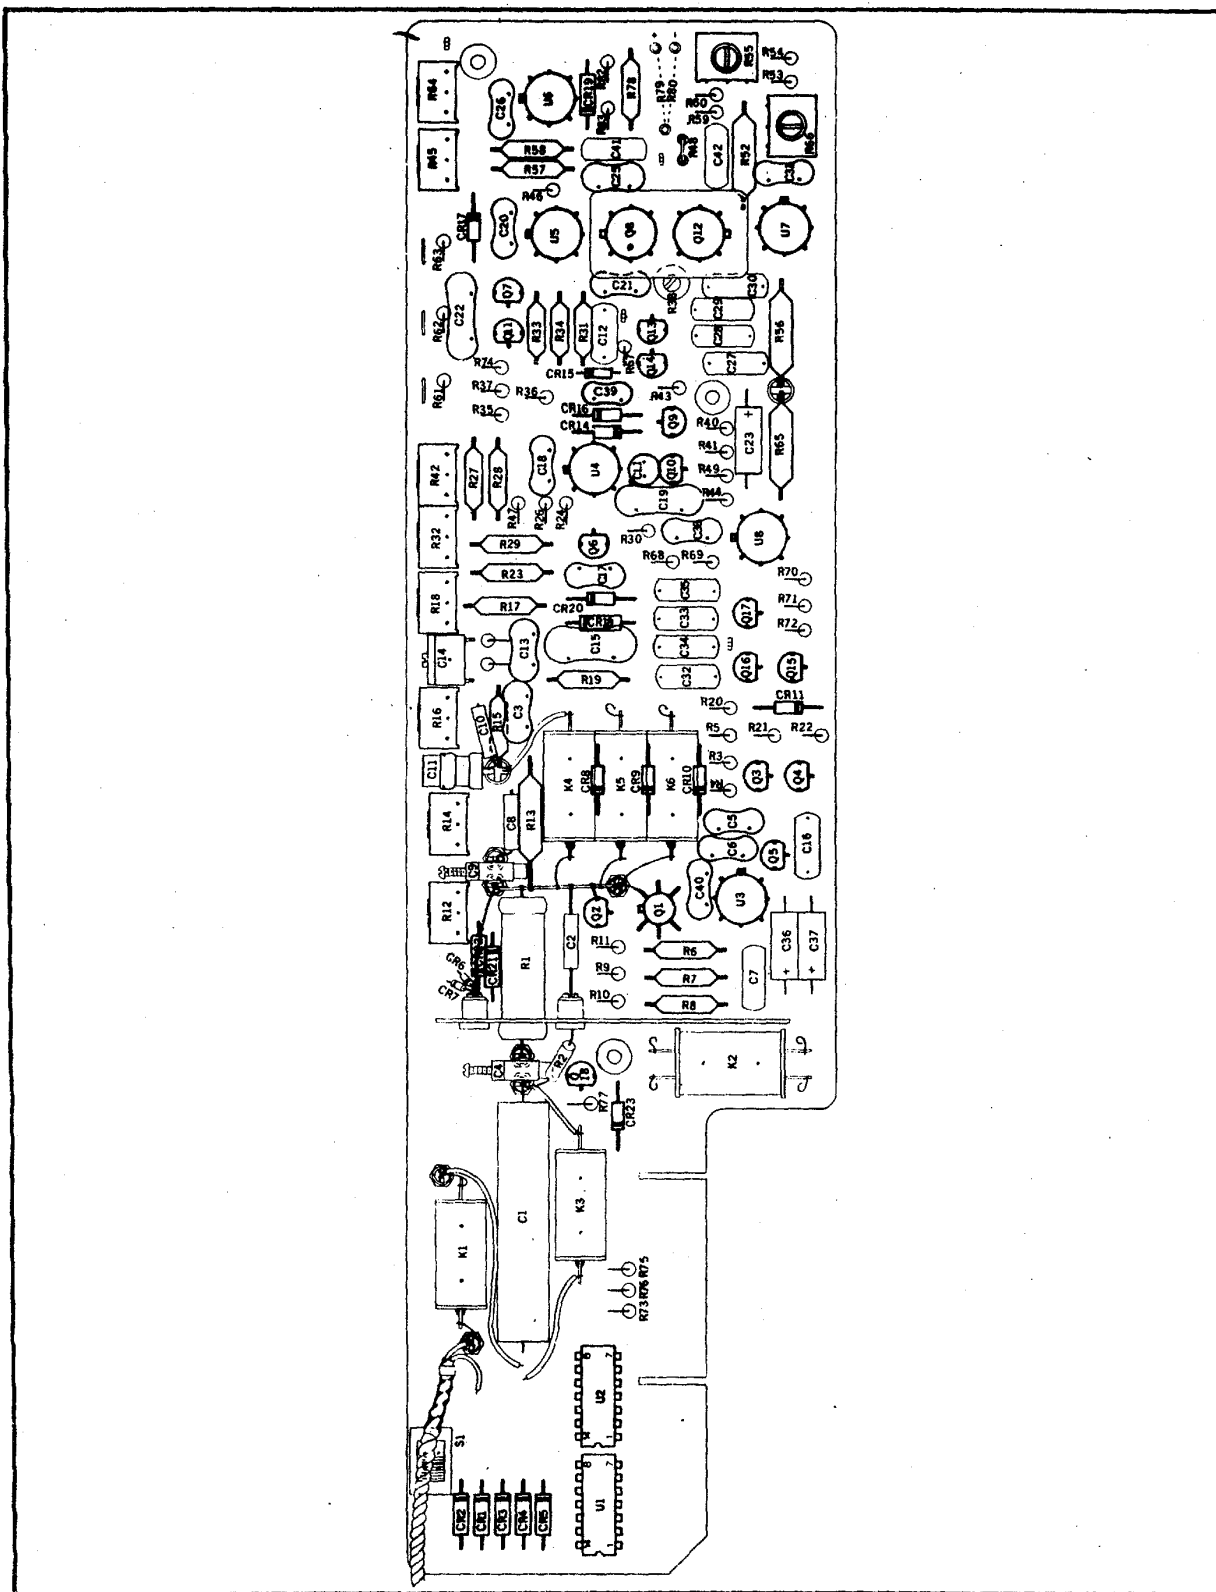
TRUE RMS CONVERTER PCB ASSEMBLY
